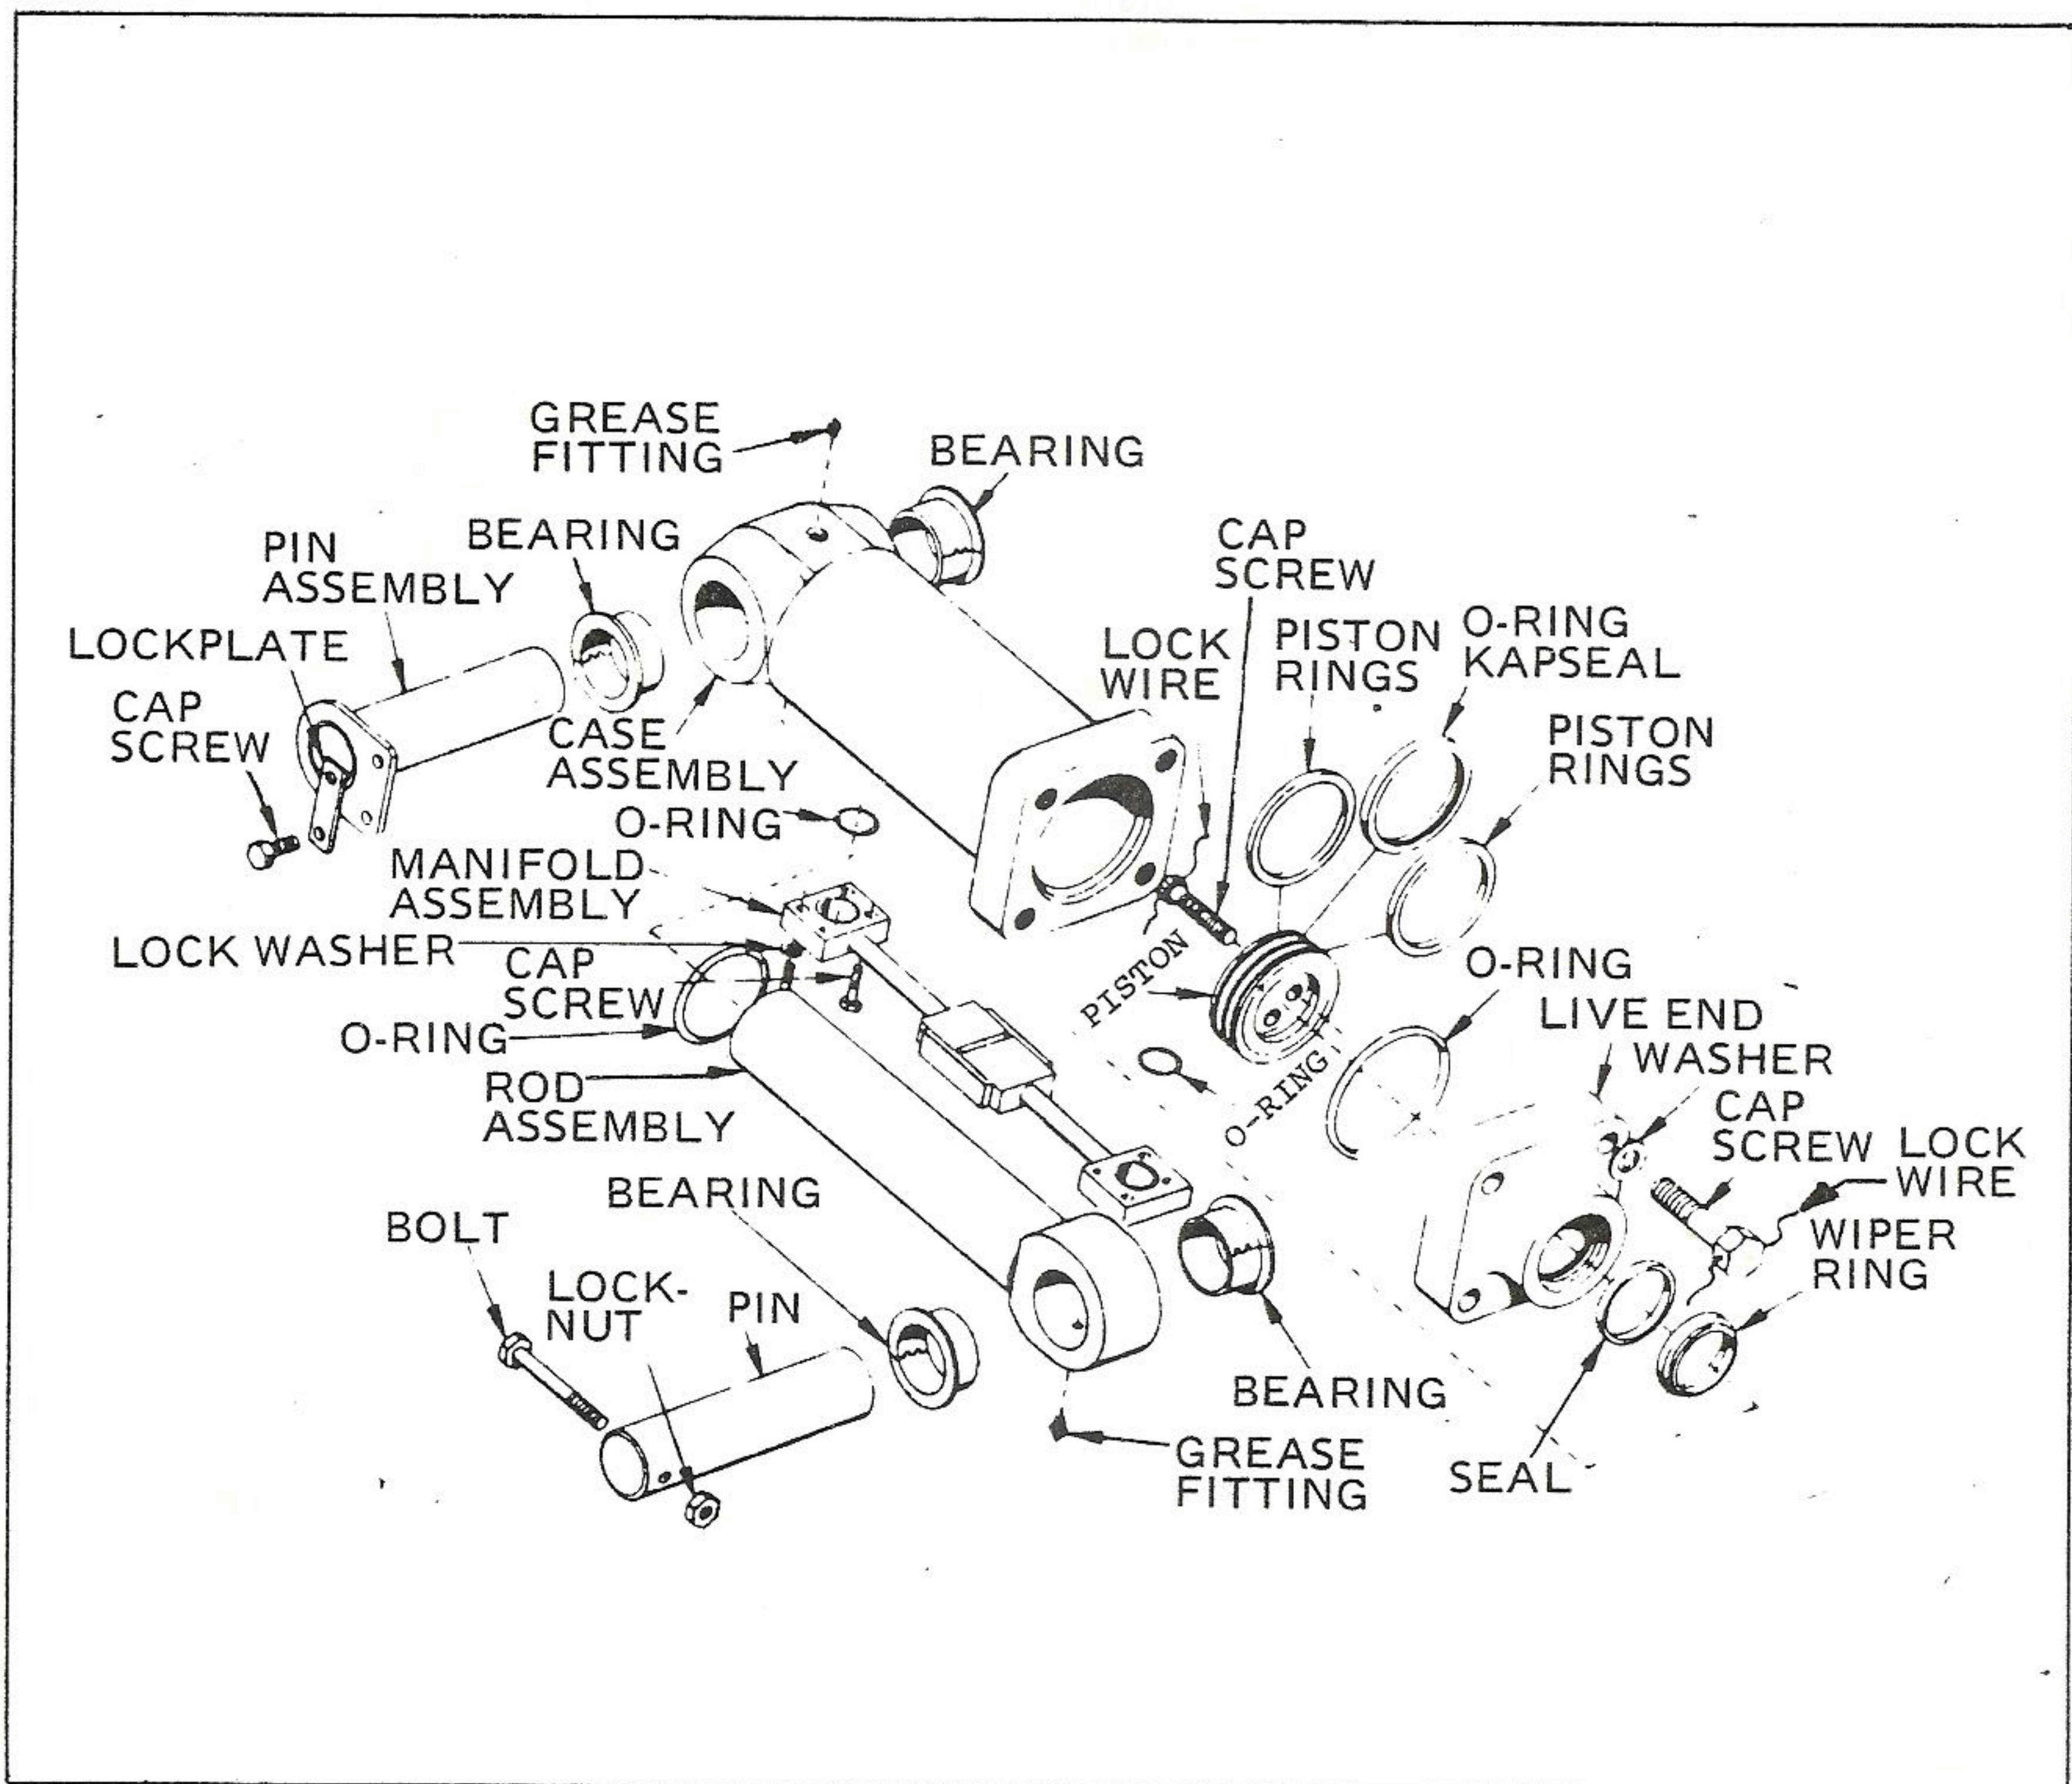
27. BUCKET TILT CYLINDER DISASSEMBLY
